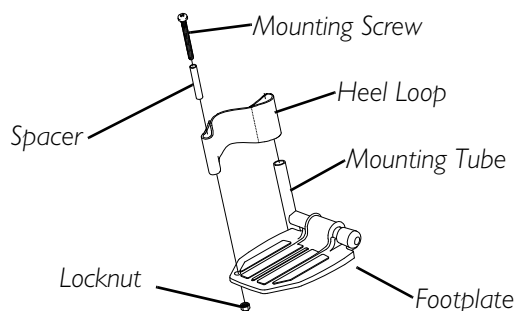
REMOVING/INSTALLING HEEL LOOPS
